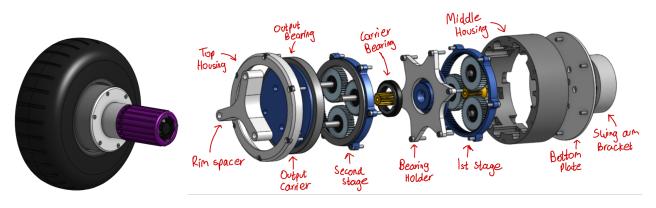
(Left) Rear view of open gearbox, (Right) Exploded view of gearbox
